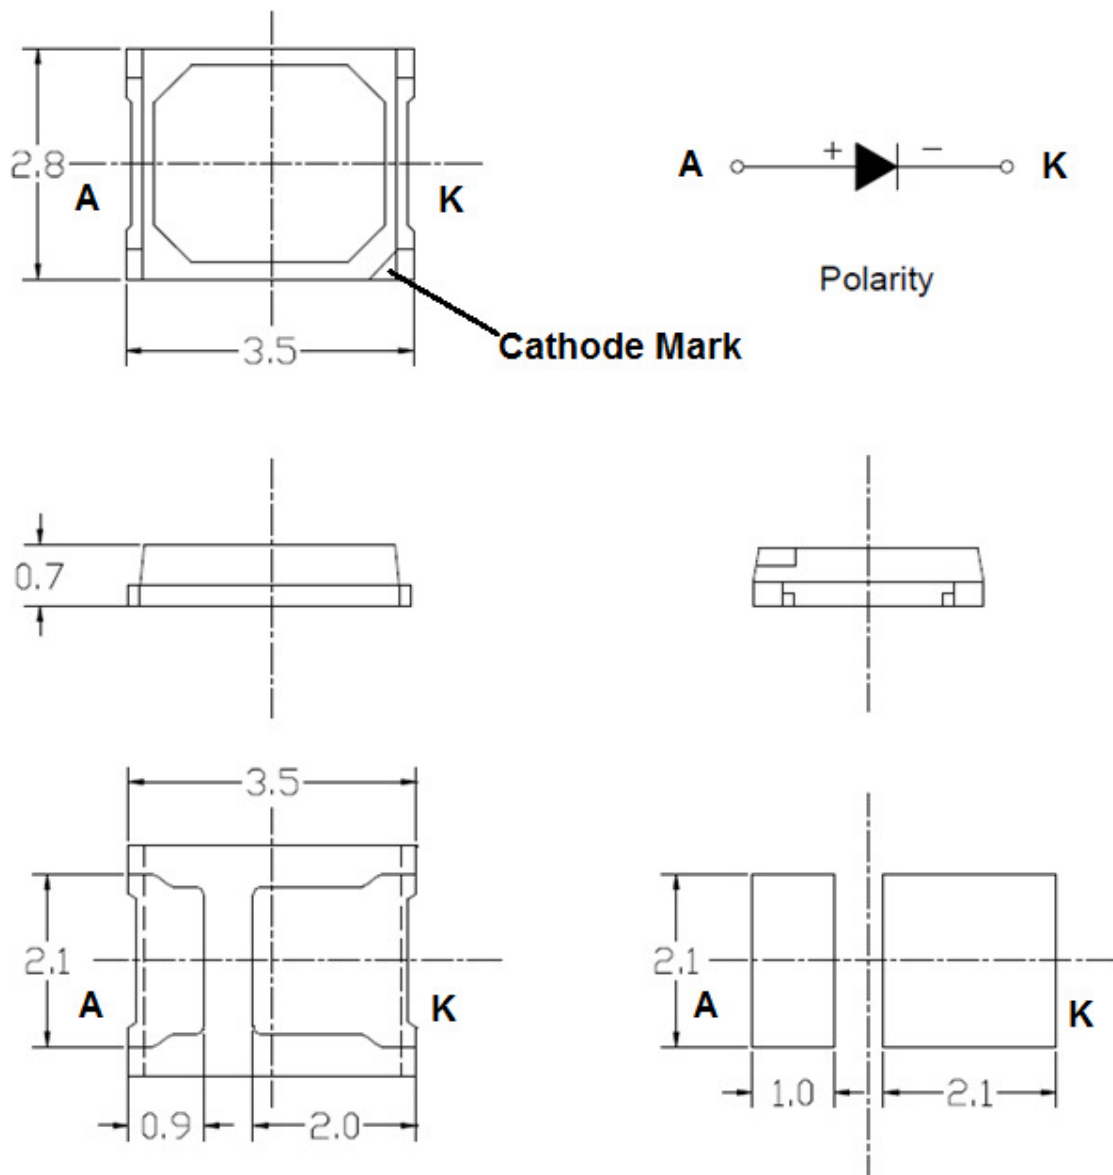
Mechanical Drawing & Soldering Pattern of the 2835 package
